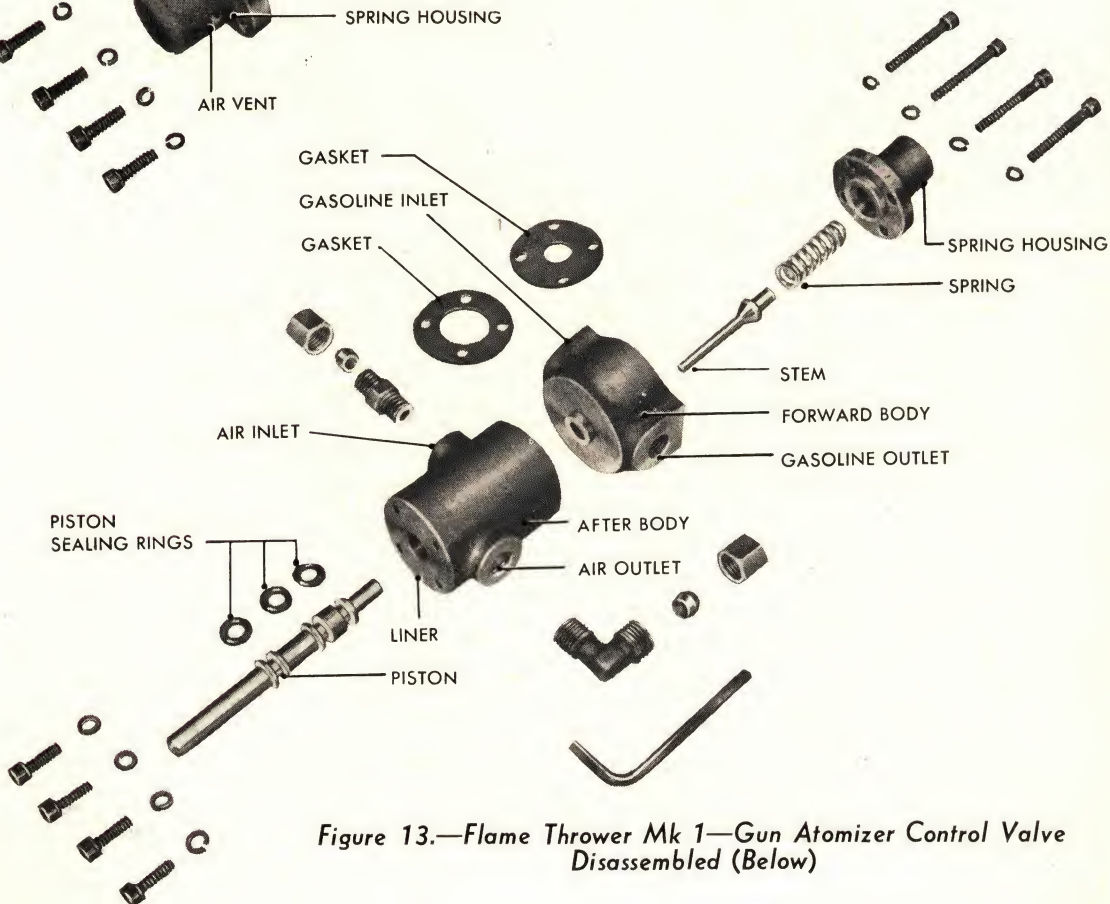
Flame Thrower Mk 1—Gun Atomizer Control Valve Disassembled (Below)
